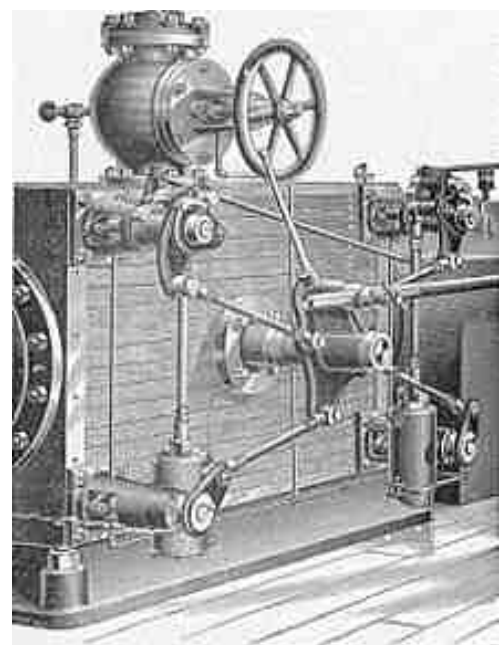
Corliss rotary valve mechanism for a horizontal steam engine.
